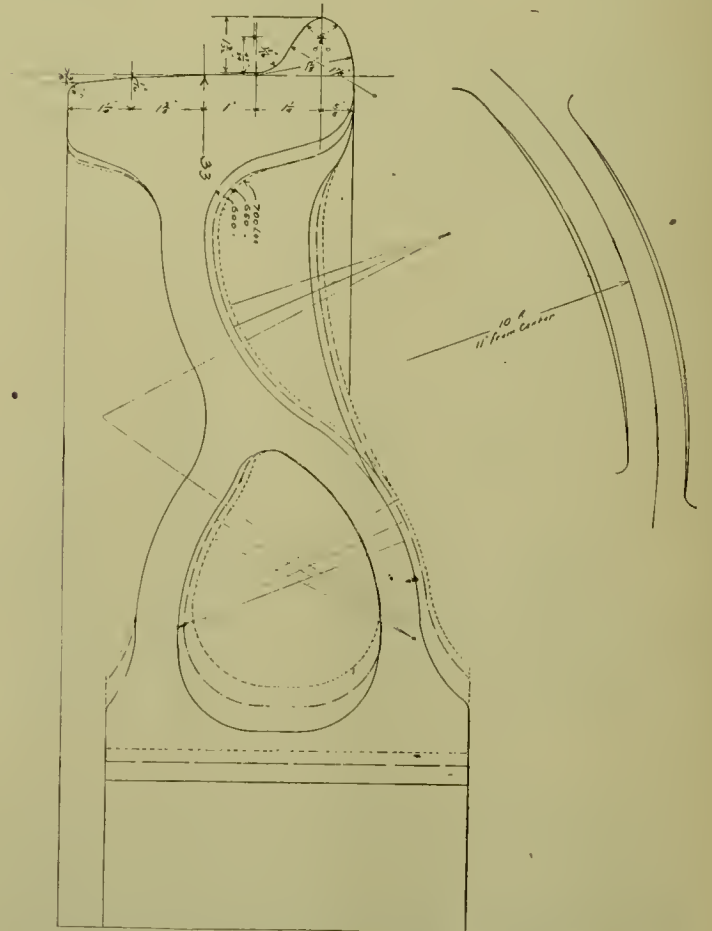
PROPOSED 33 IN. 600, 650 AND 700-LB. CAST IRON WHEEL.
